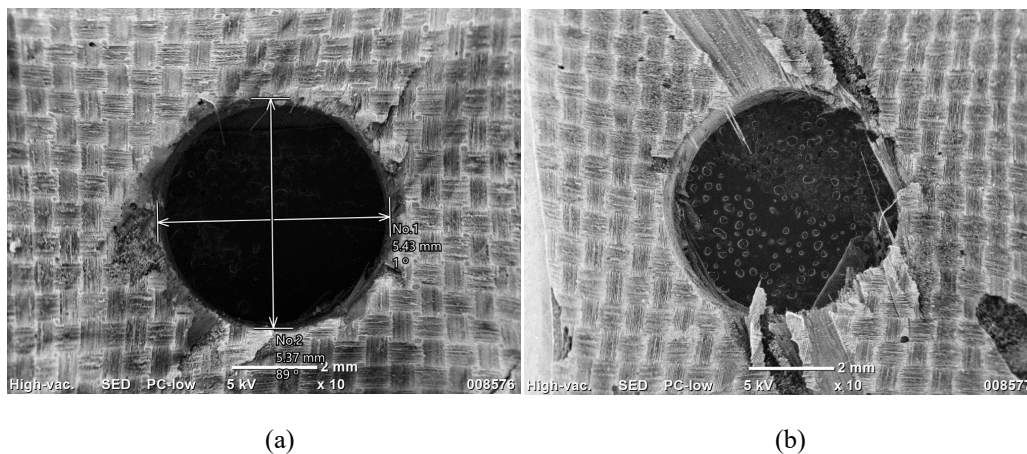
CFRP Specimen at (a) Entry (b) Exit with fibre Orientation of 60°
